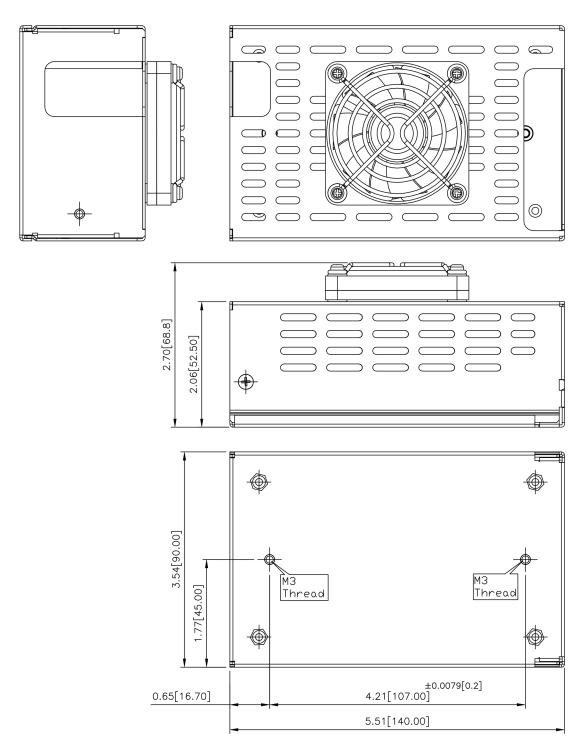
Mechanical Drawing - EPG500-1XXX Cover Kit
